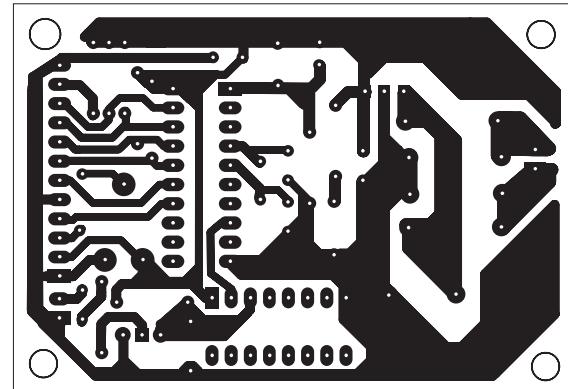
Actual-size, single-side PCB layout for frequency meter
